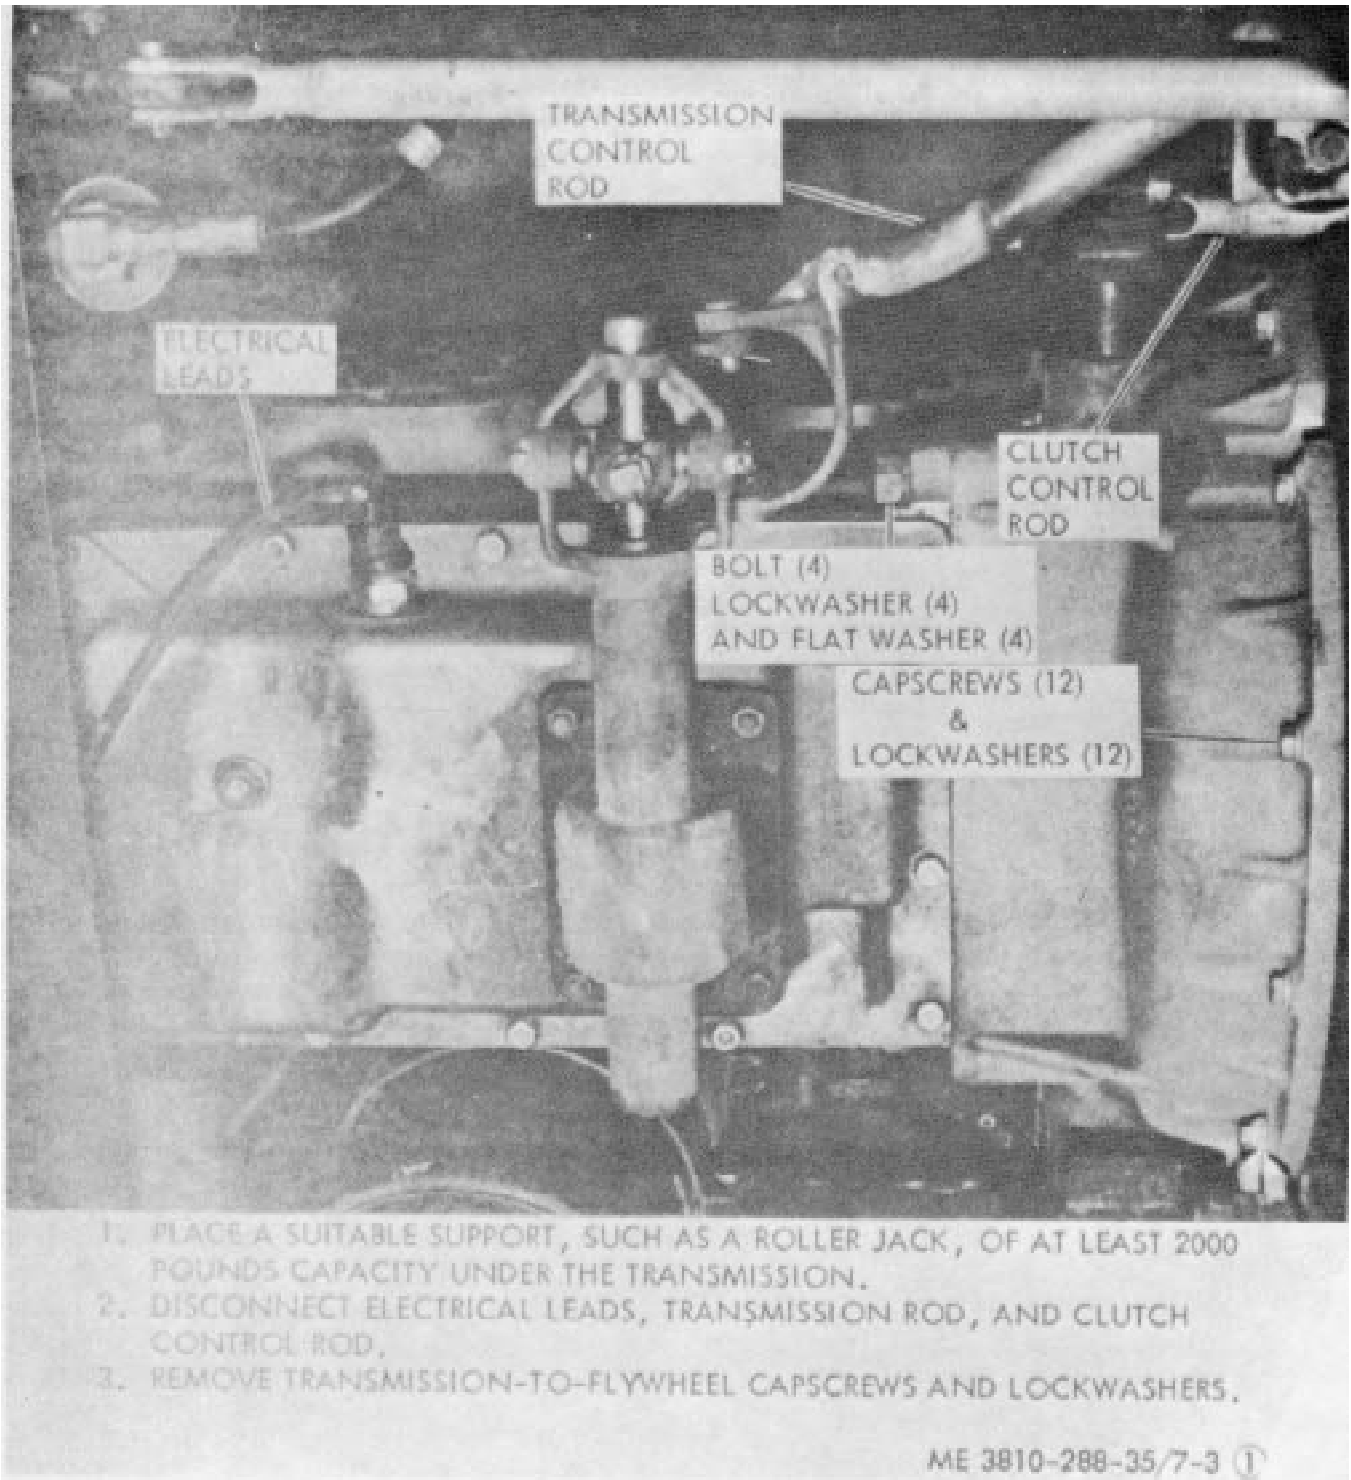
Transmission assembly, removal and installation . (Sheet 1 of 2 .
